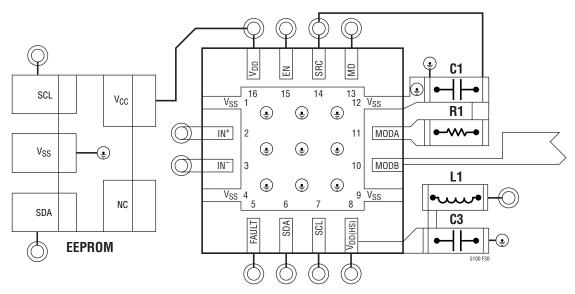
Layout of the Minimum Component Count Circuit Using 0402 Passive Components
